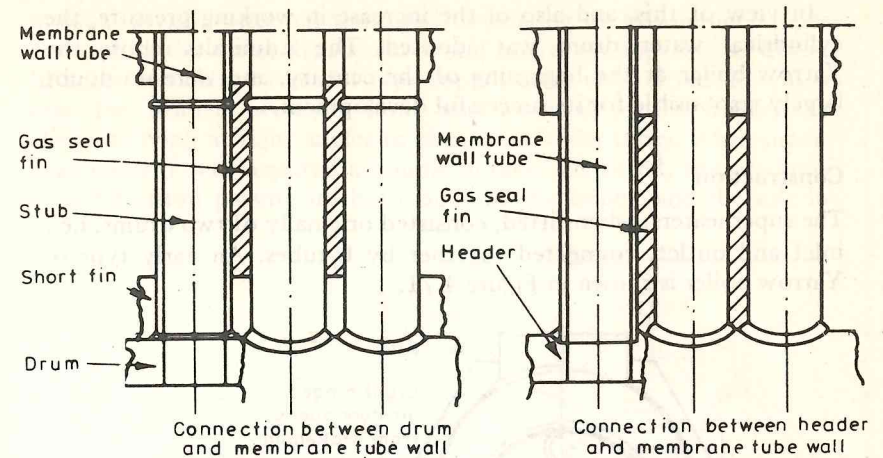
Details of connections between drums, headers and membrane tube walls
